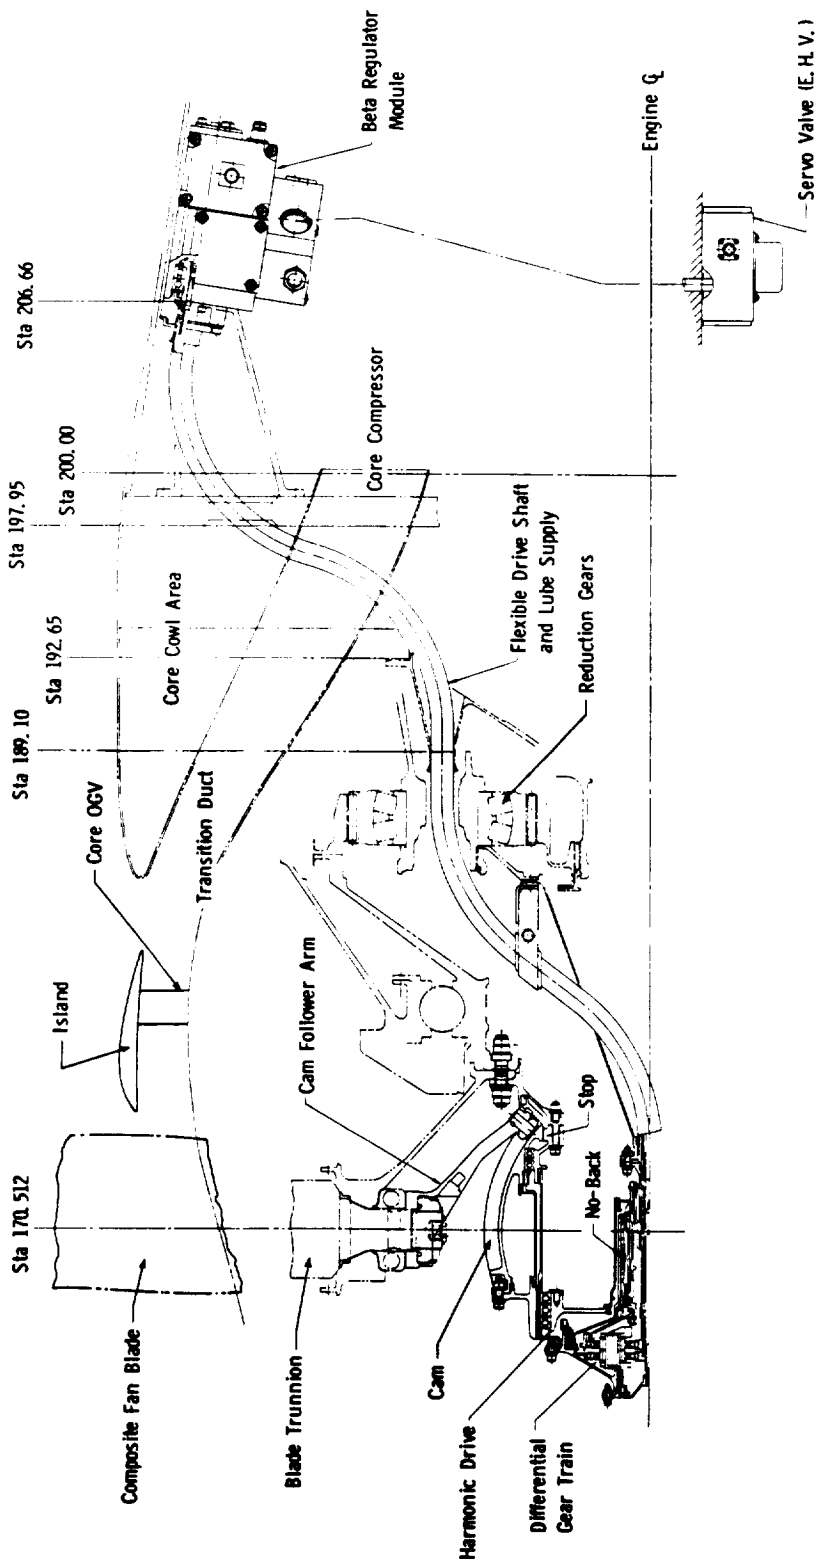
Hamilton Standard Cam-Harmonic Drive Actuator System.
